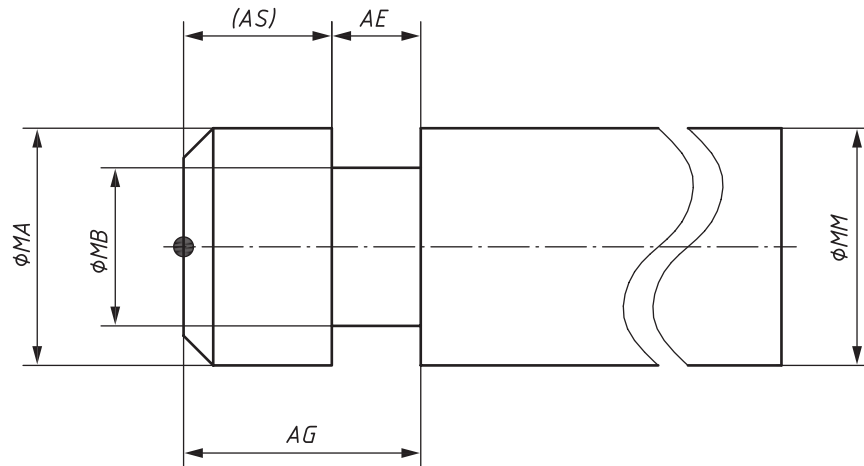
RFE_x — Grooved piston rod end with TRP at the end of the piston rod
